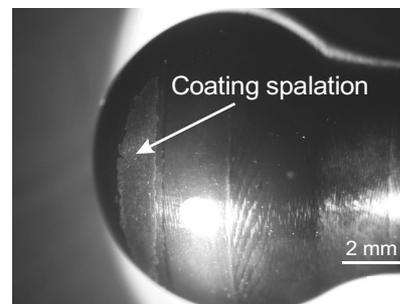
OM micrograph of TiAlN+DLC coated cemented carbide forming tool already after first SPIF formed part
